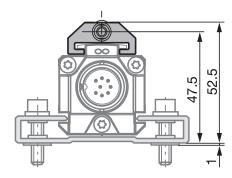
Dimensions and distances with BTL5-T-2814-1S magnet
